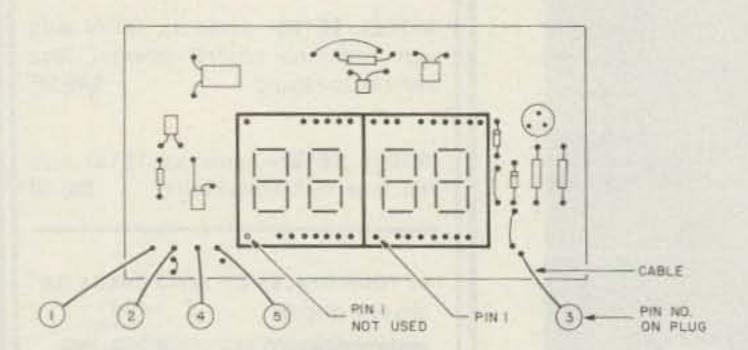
Another view of the DPM, showing installation of the LEDs.
